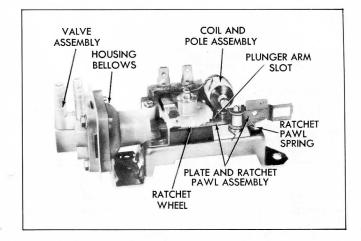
Washer Pump Assembly—Tempest and Firebird
